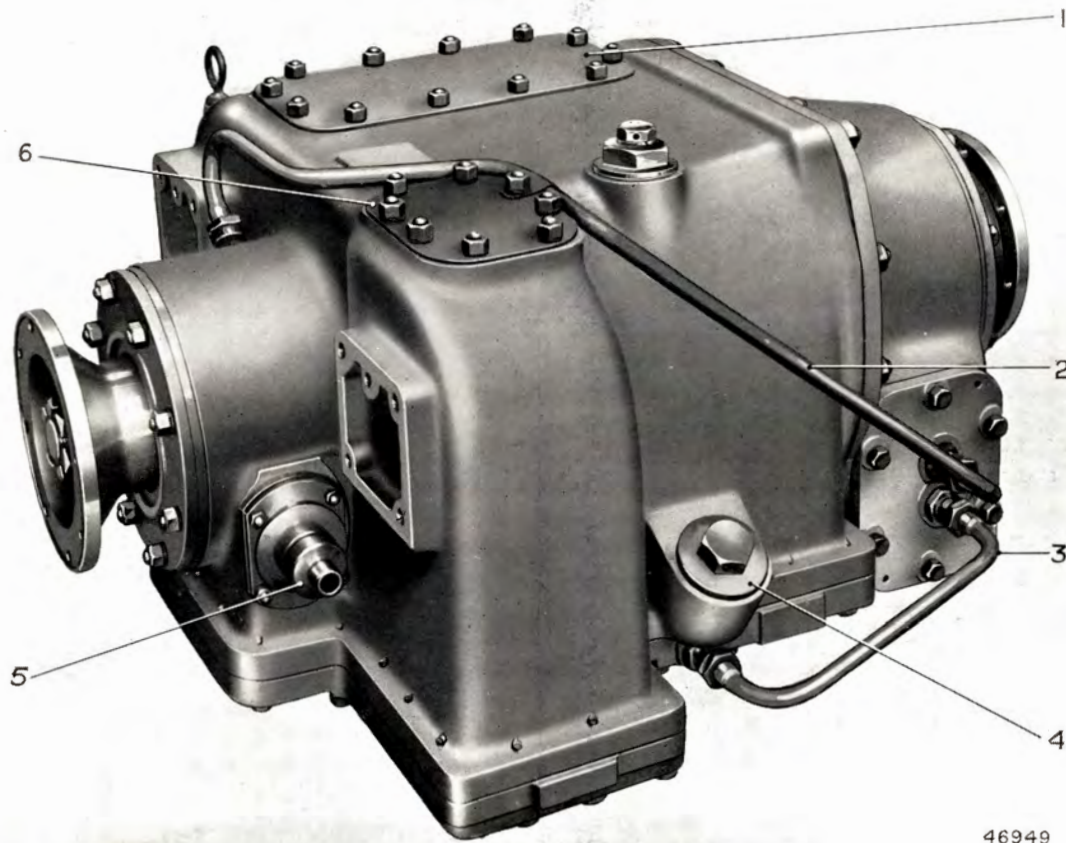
RIGHT-HAND VIEW OF THE GEARBOX
